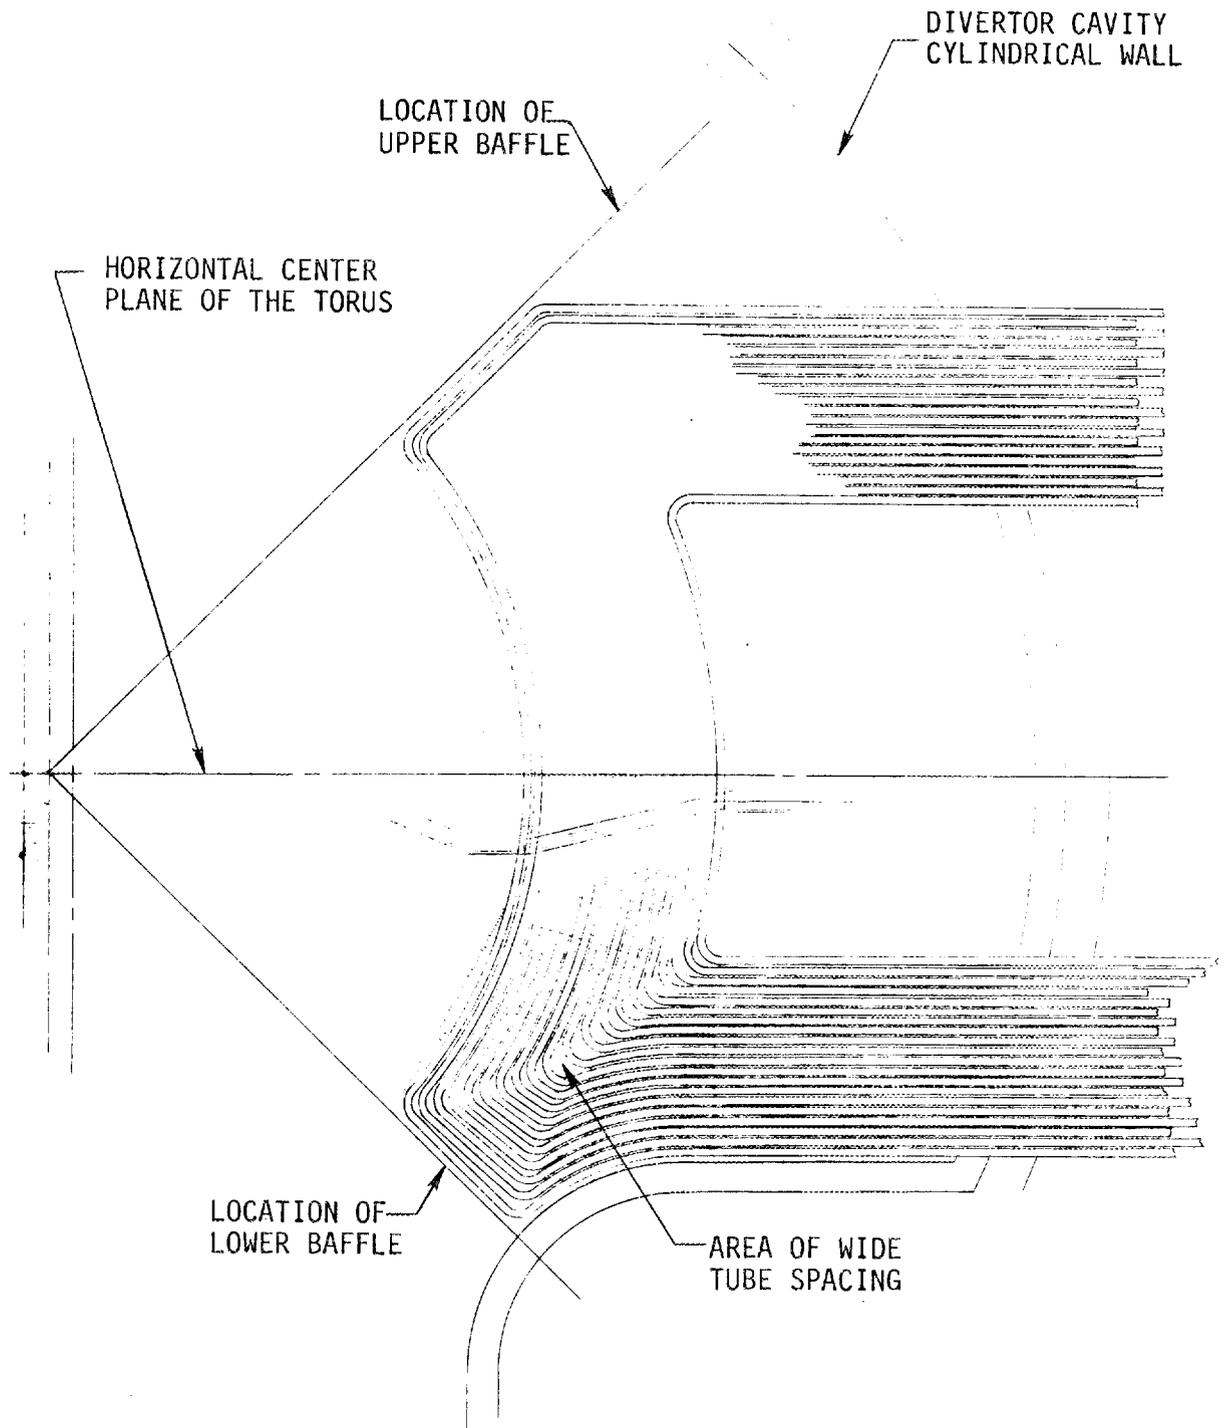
Elevation View of the Tube Pattern for the Removable Targets Showing the Wider Tube Spacing at the Corners
